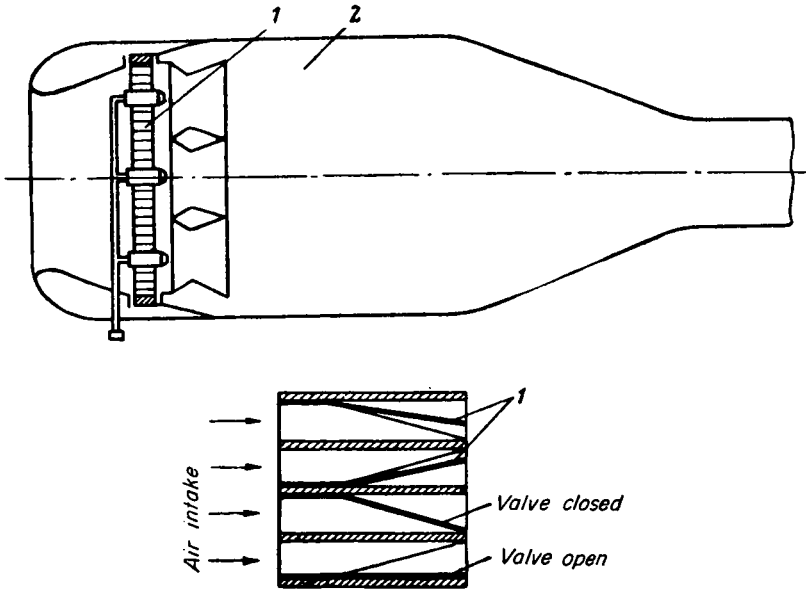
The arrangement of a pulse jet motor: 1, reed check valves; and 2, combustion chamber.
